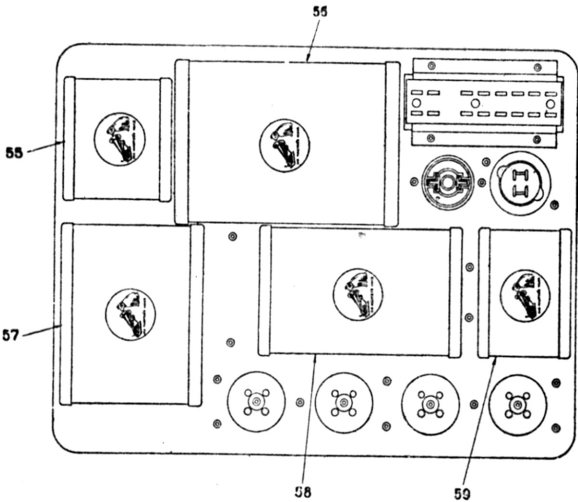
Top View of Power Amplifier Unit, Showing Parts
